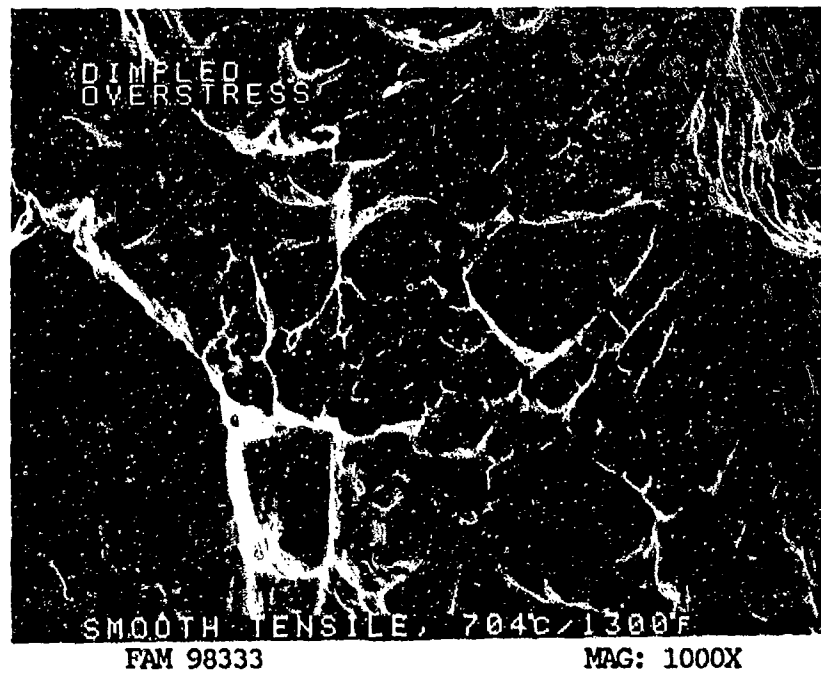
Mixture of coarse and fine shallow dimples in the primary fracture area. A light oxide covers the fracture surface.
